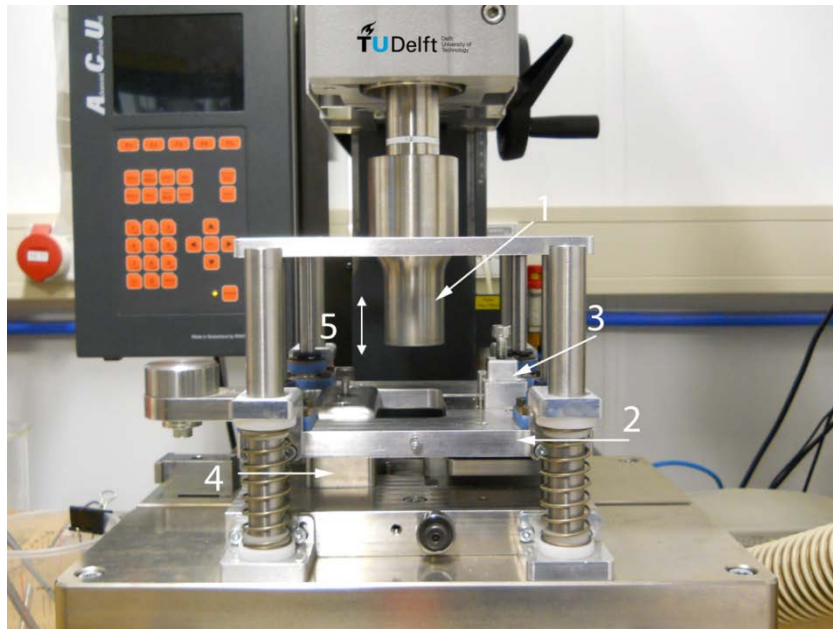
Ultrasonic welding setup: (1) sonotrode, (2) moving platform for top clamp, (3) top clamp, (4) bottom clamp, (5) direction of the vibration.
